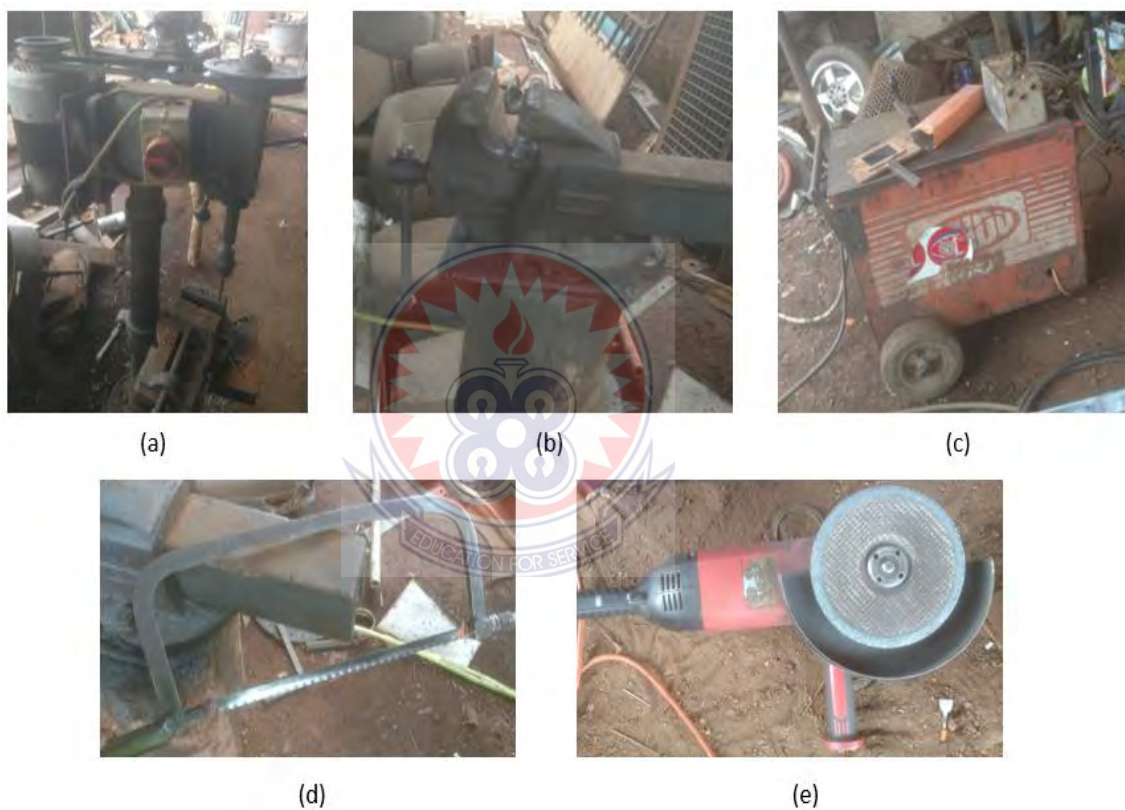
Tools and equipment used (a) Pillar drilling machine (b) Vice (c) Arc welding machine (d) Hacksaw (e) Grinding machine.
